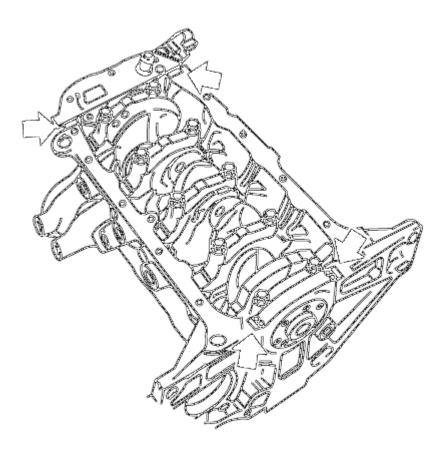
Engine Oil Pump Courtesy of GENERAL MOTORS COMPANY
